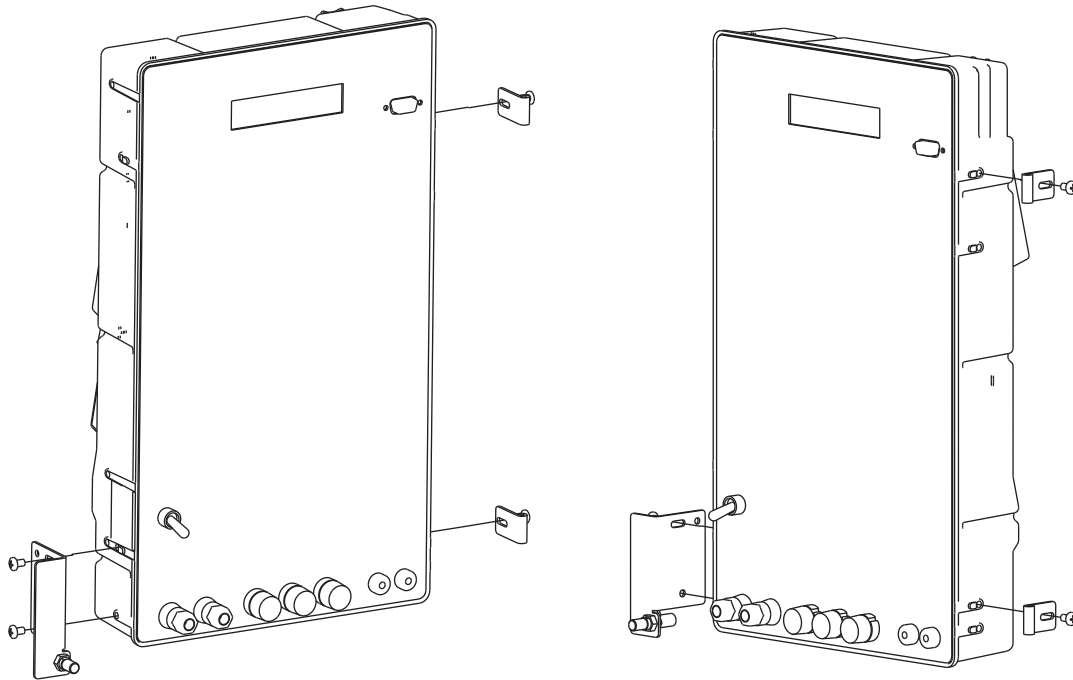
Attach Hinges and Latch to the SEL-2431 for Mounting in a GE Voltage Regulator Enclosure
